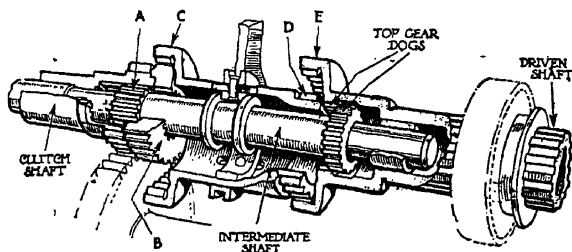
The Graham Paige Twin-Top Gear Arrangement.
